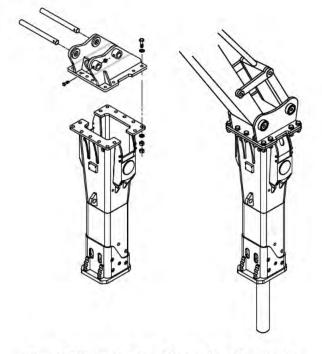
Housing Box, Mounting Bracket & Hardware (Typical)
